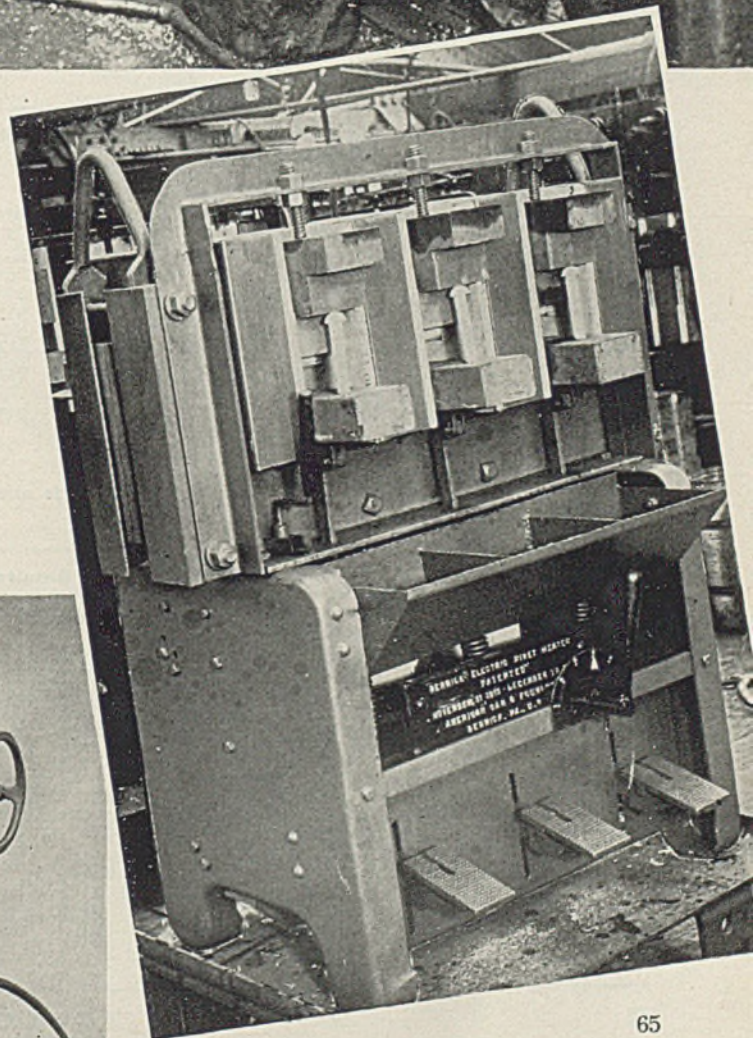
(Above)—Here is a fully automatic unit heating bar blanks for forging into drag link sockets. Note that it is a dual machine with two sets of controls, two piles of bar blanks, two delivery chutes to operator's pickup station. Forging machine is just to right
